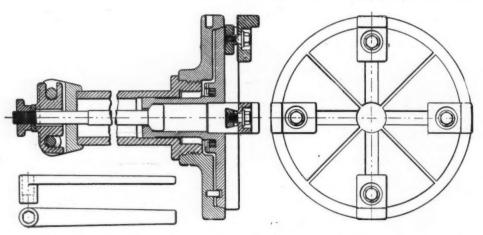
Sectional View of the Step Chuck and Closer with Adjustable Jaws.
